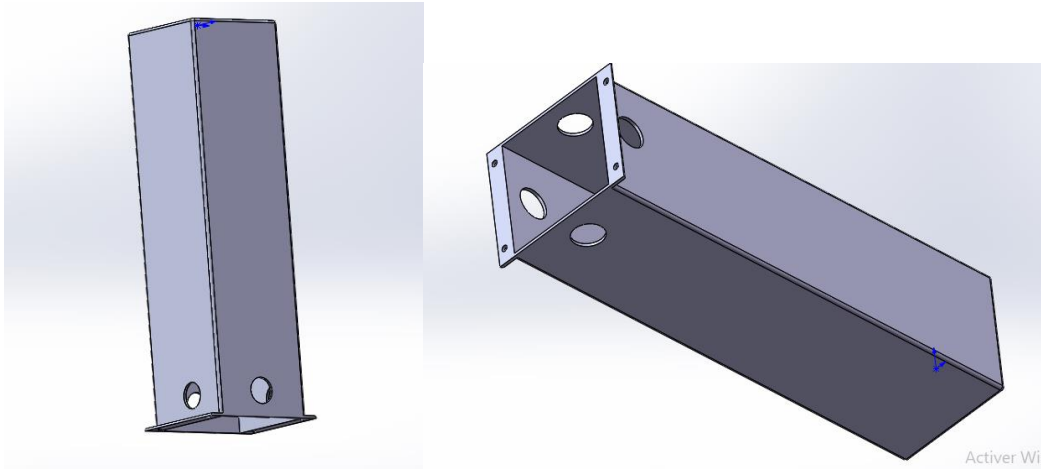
Image of the print of UV lamp holder on SolidWorks
